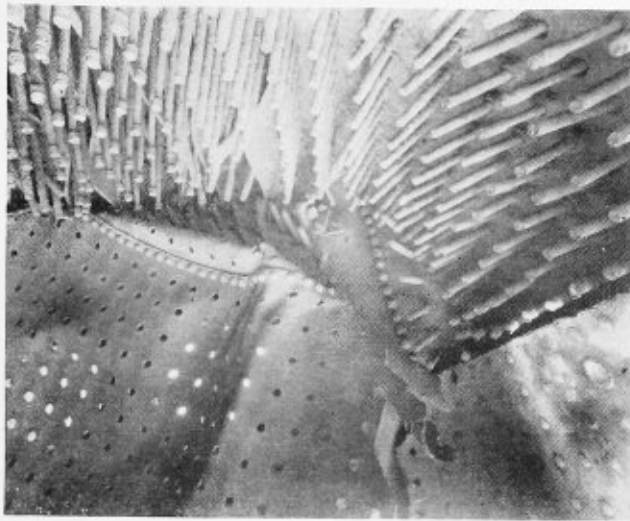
Both riveted and welded seams failed in this low-water explosion
